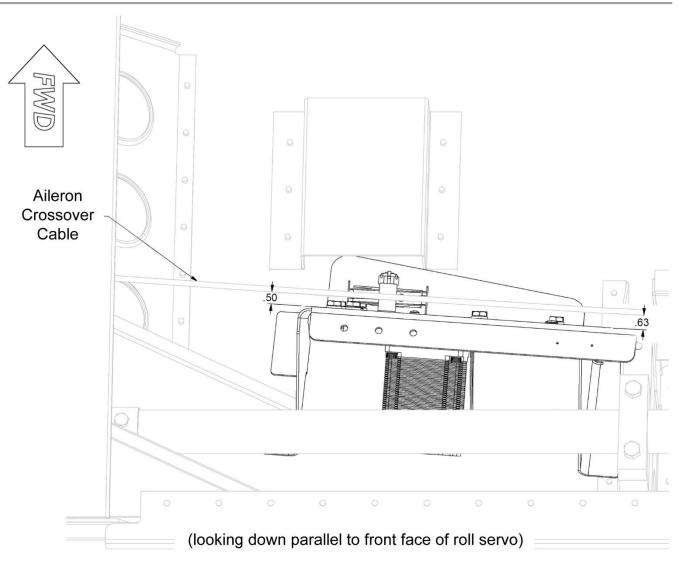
Roll Servo Base and Mount Bracket Assembly Alignment
